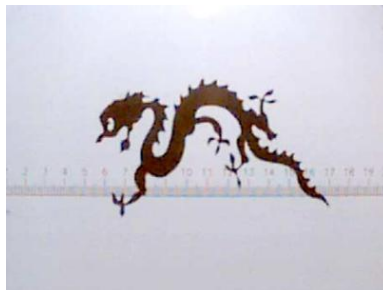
Copper electrode sheet machined by WJ, 80  $\mu\text{m}$  WJ nozzle and the final tool produced by MEDM.
